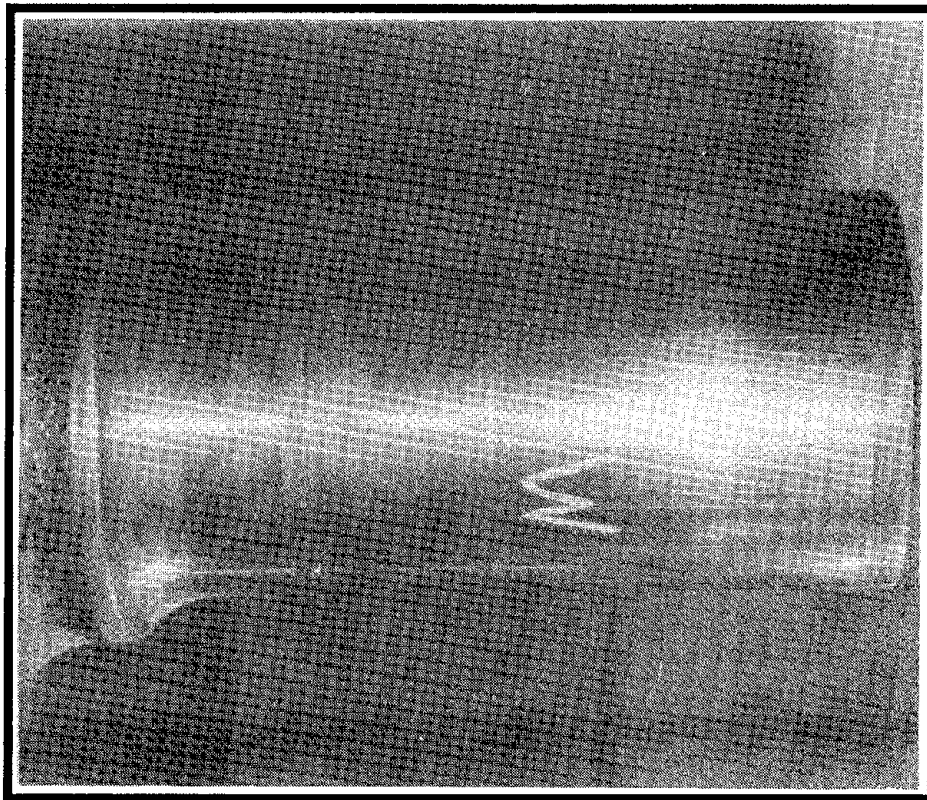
RBFM II Post Test Axle Journal Condition – Bearing L
